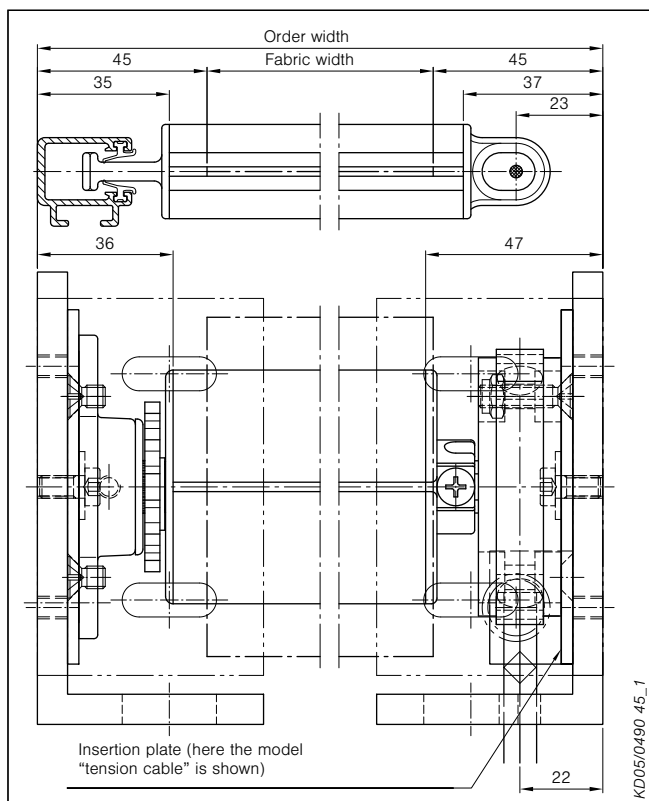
Vertical awning 491, guide cables or rails, gear - spindle lock situation
